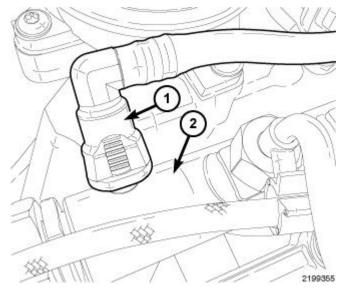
Fuel Return Line & Fuel Rail Courtesy of CHRYSLER LLC
